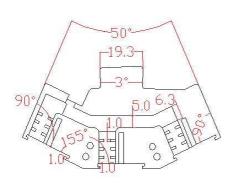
Engineering dimension drawing for 40314 (unit:mm)
